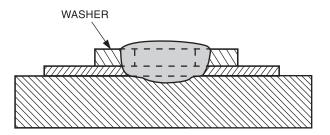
B—Arc Spot Weld Using Washer (see 2.3.5.3)
